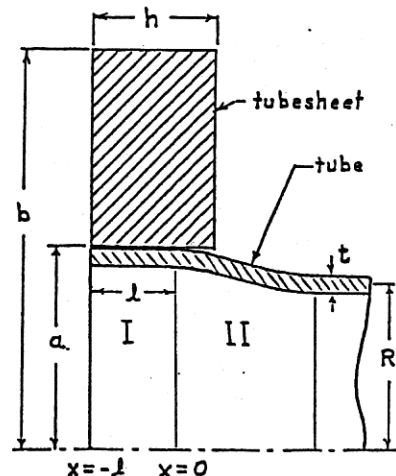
Geometry of an expanded tube-tubesheet joint. I—expanded zone; II—transition zone.
